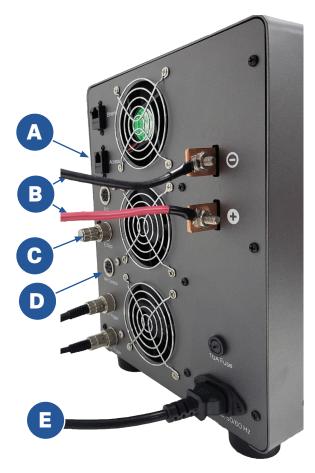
Unbox the Pico and make sure these basic connections are completed: Power (E), weld cables (B), E-Stop (C), and Accessory Port (A).
